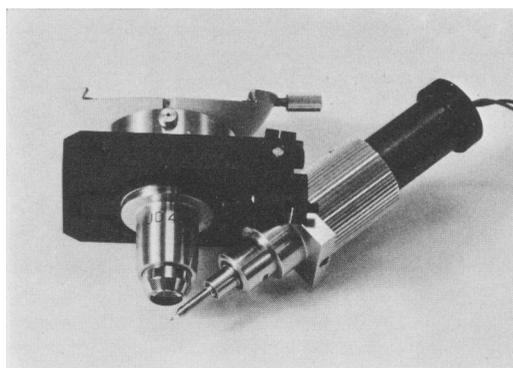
Micro-drill mounted on a centrable holder for single objectives. A drill rod furnished with a polished monocrystalline diamond tip is in the pin-vice of the drill.
